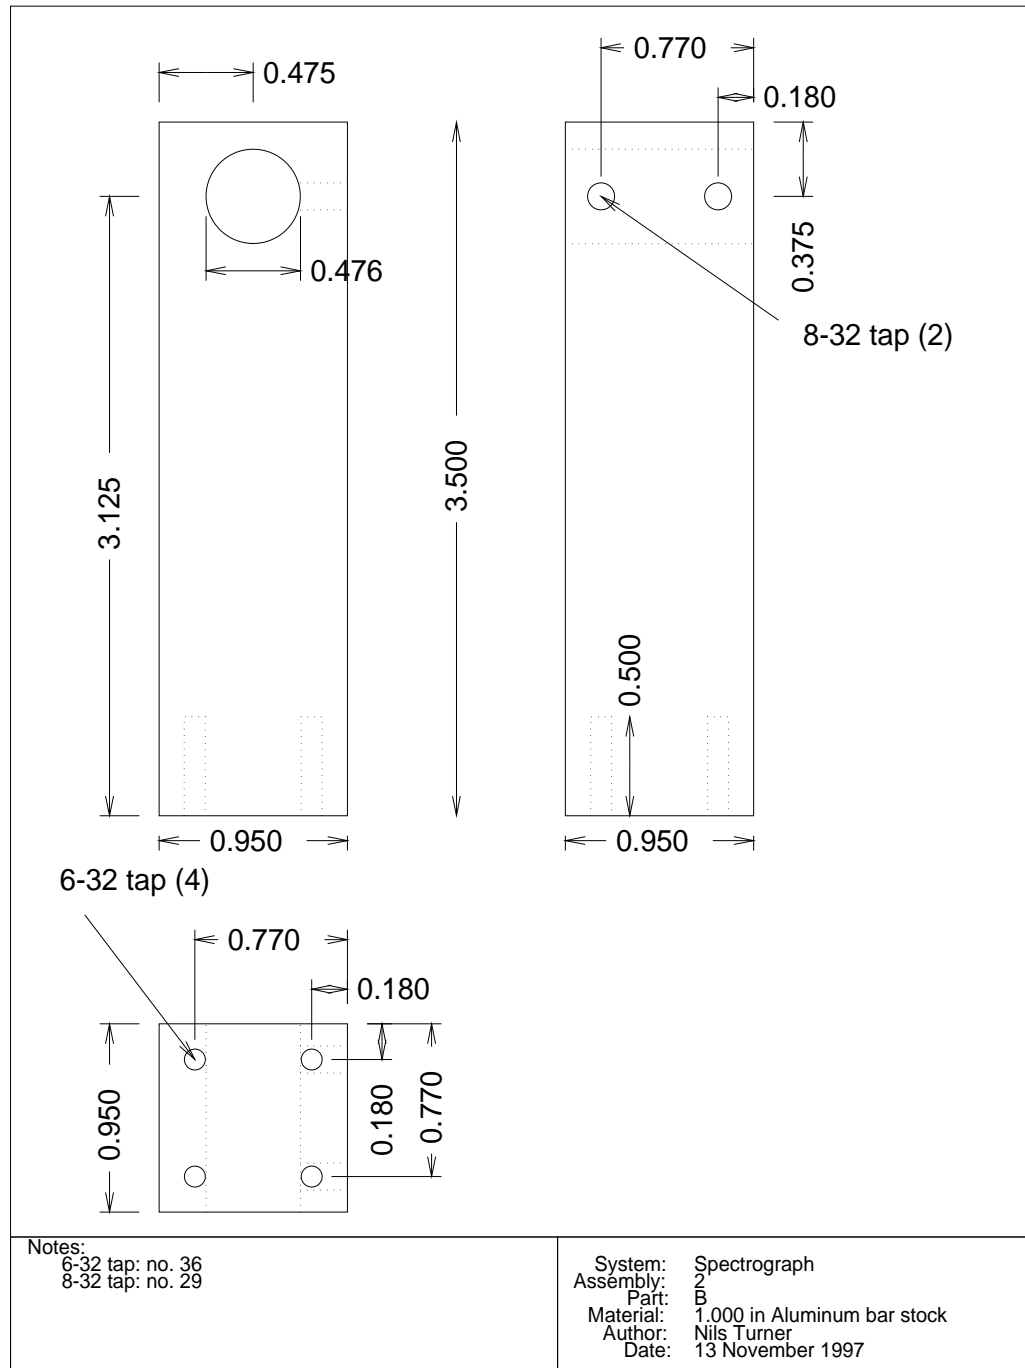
Spectrograph, Part 2B*. This part is a piece of the cylindrical element mount rotation adapter.
